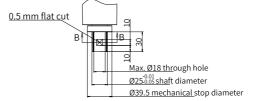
Installation position of auxiliary tooling for IR-S20
